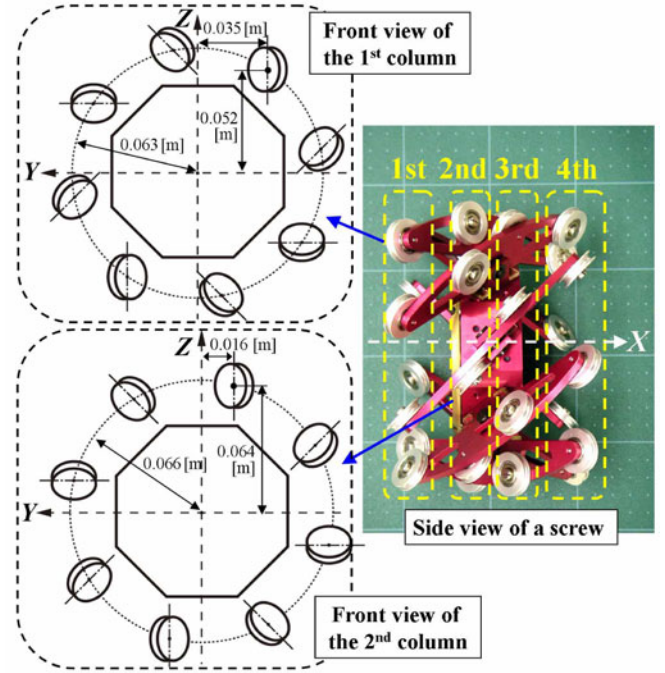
Alignment of passive wheels (left screw-drive unit).
